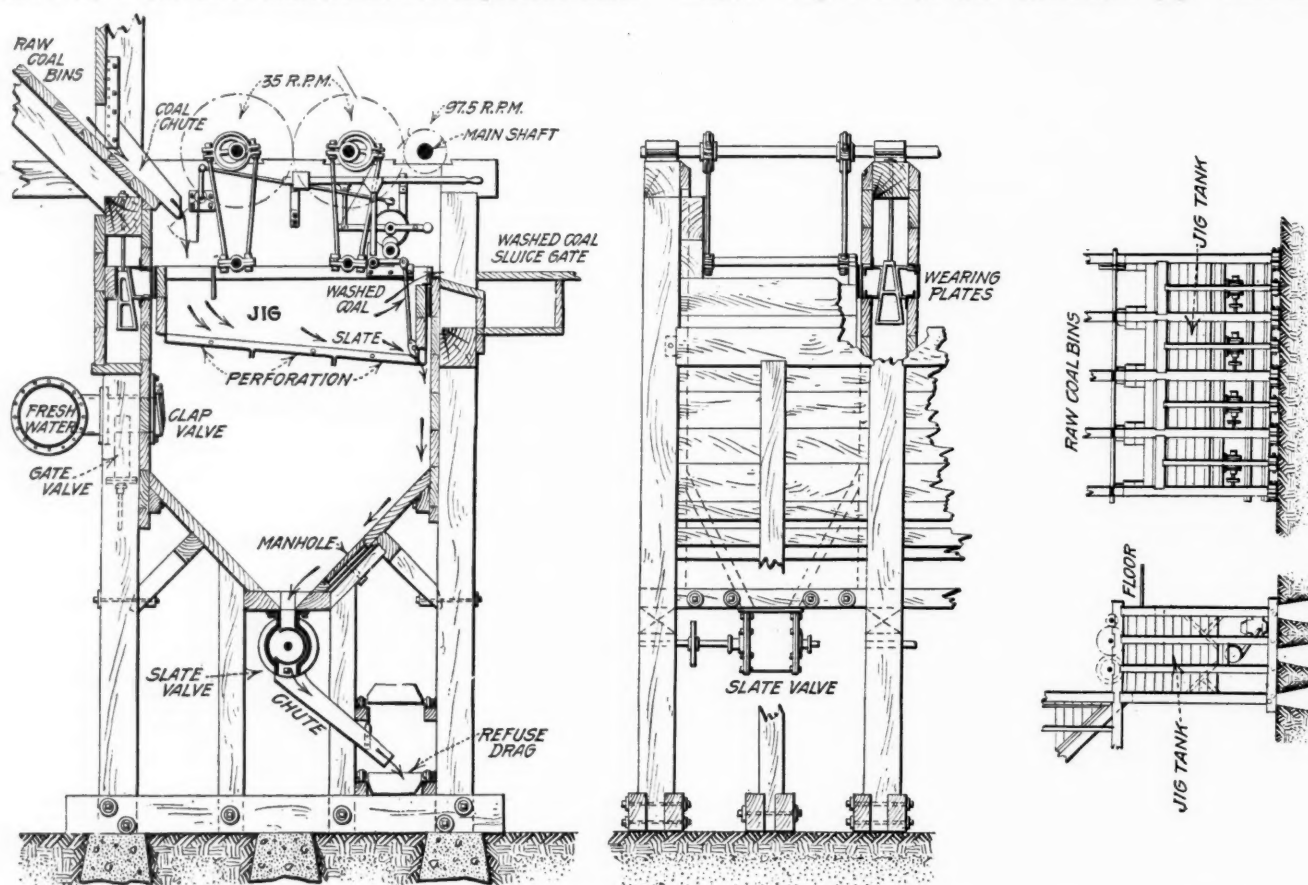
SECTIONAL AND ELEVATIONAL VIEWS OF "AMERICAN" COAL JIG, SHOWING MECHANICAL DETAILS
